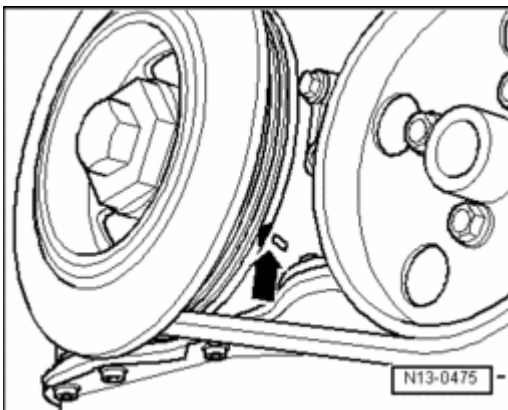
Identifying Crankshaft At Vibration Damper Securing Bolt In Engine At TDC Cyl. 1
